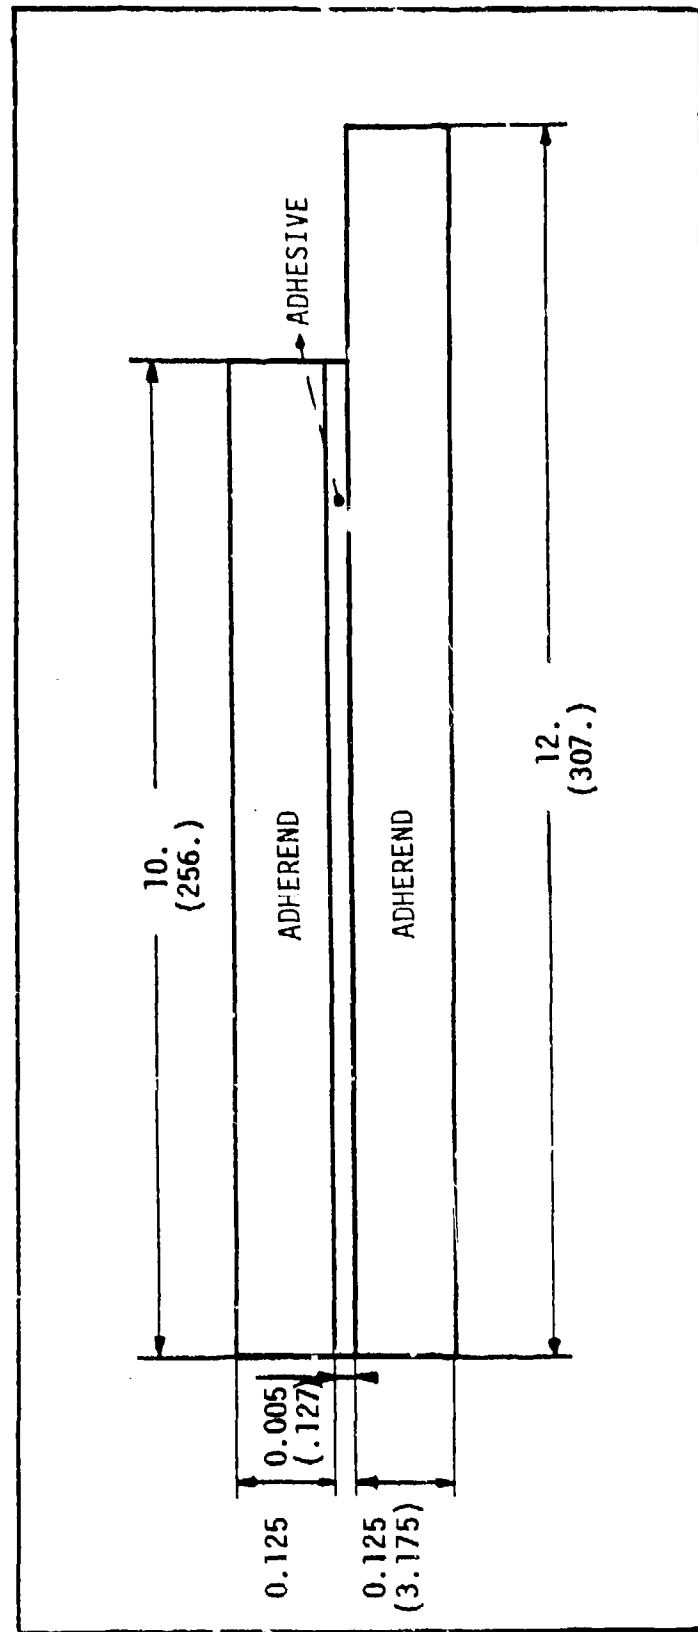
Geometry of the Crack-Lap Joint Analyzed in this Section, Dimension in Inches,
